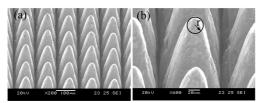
(a) micro pin array machined by laser beam and (b) enlarged view of micro pin
